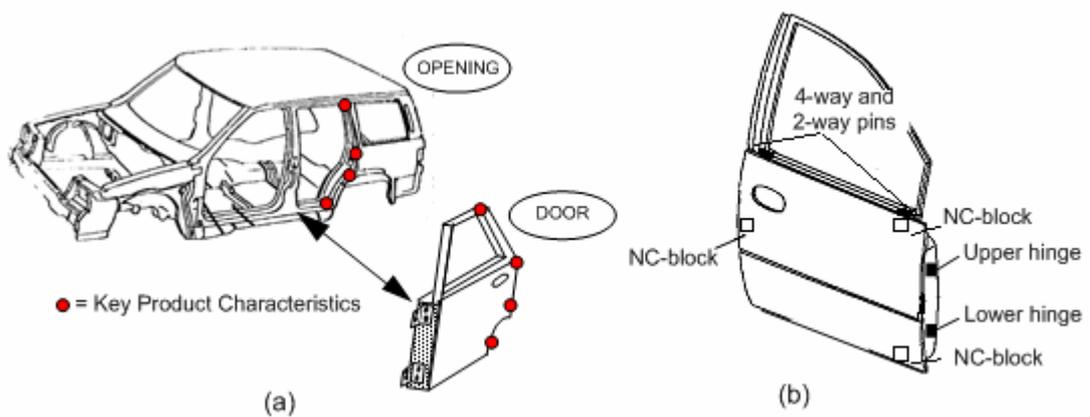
Door fitting assembly (a) *KPC* location on side frame and door to measure gap and flushness; (b) *KCC* fixtures in assembling door.
